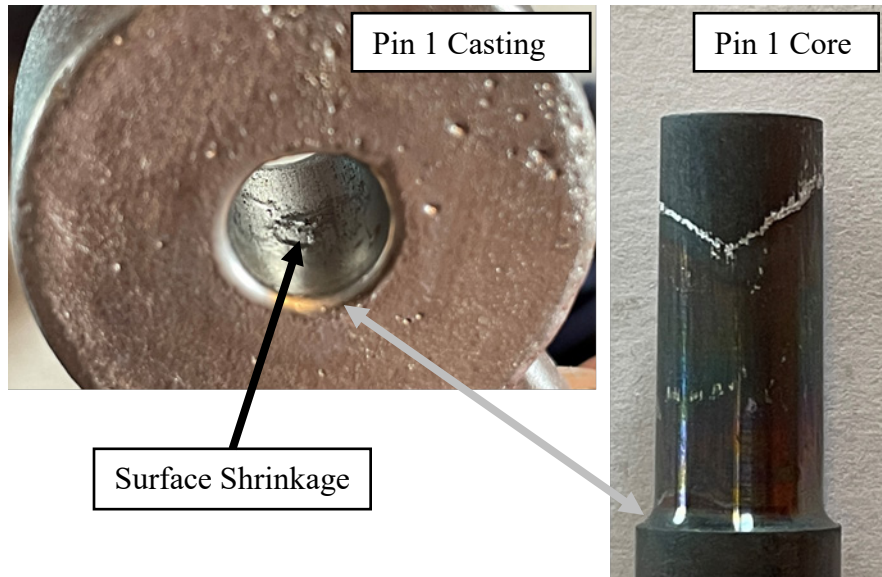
Casting surface for hot ejection test showing surface shrinkage (casting) and aluminum buildup (core).
